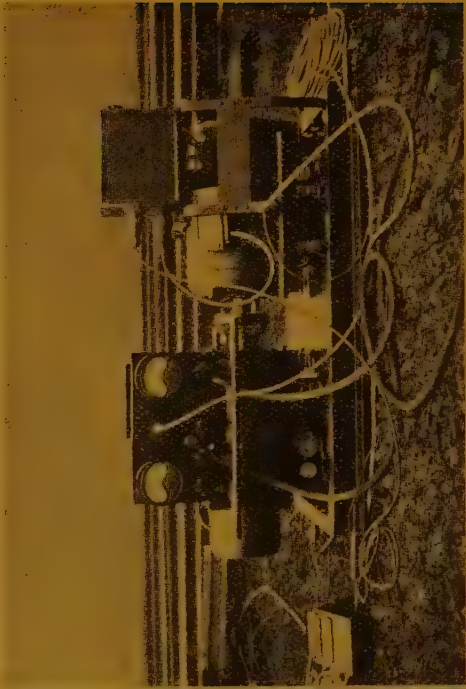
Motor-generator portable welding plant for working off live rail.
